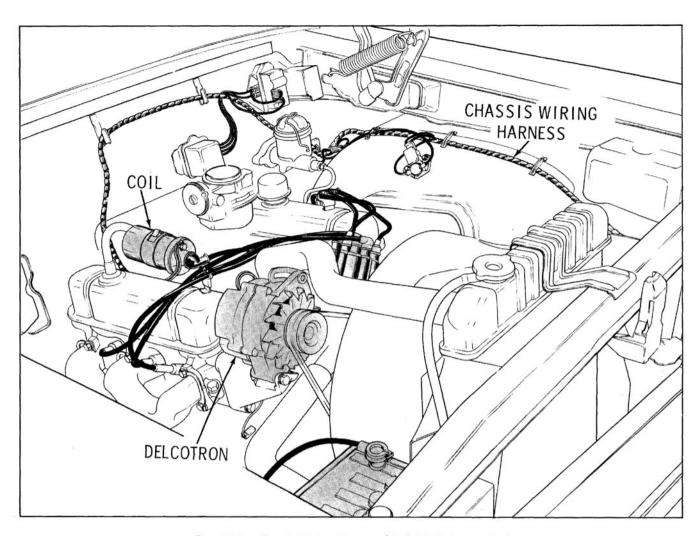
Chassis Wiring Harness (30-31 & 32 Series V-6)
